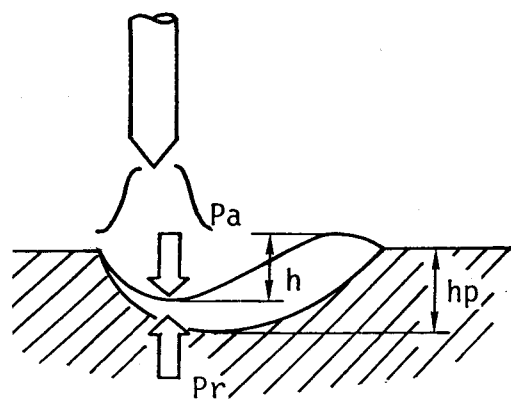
Pressure balance in the molten pool of TIG welding.
